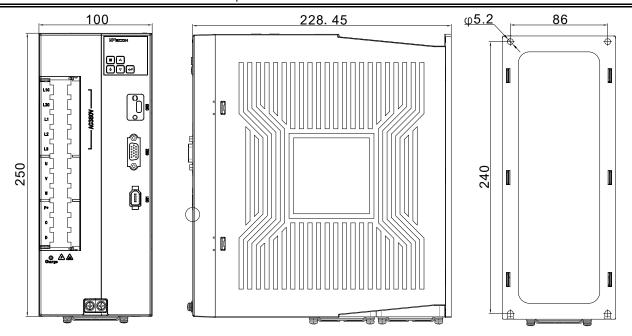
Installation Dimensions of VD3E Type C Servo Drive
